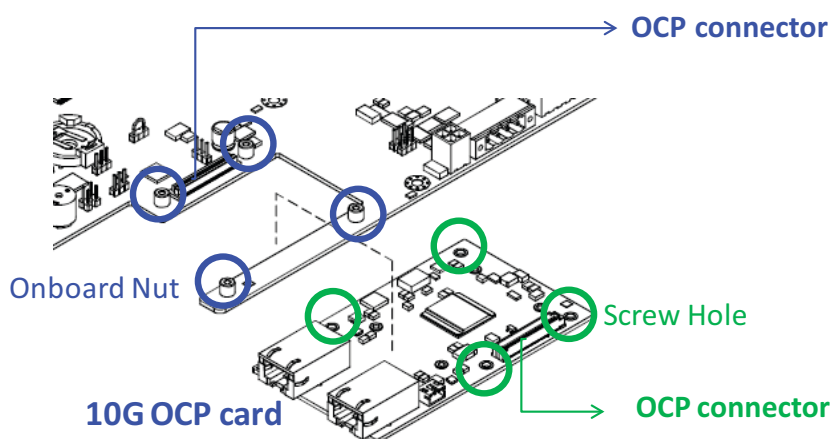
Assembly Drawing - 10G OCP card to SOM-DB5920
